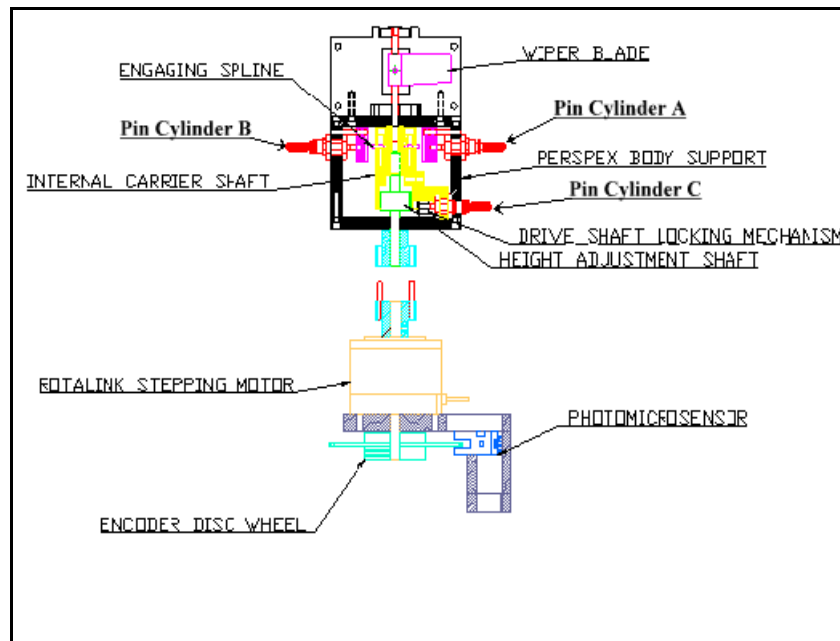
Section View Showing the Parts of the Wiper Blade Tool
